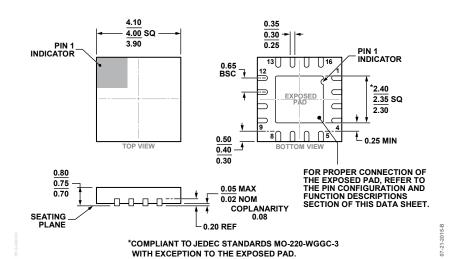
16-Lead Lead Frame Chip Scale Package [LFCSP] 4 mm × 4 mm Body and 0.75 mm Package Height (CP-16-20) Dimensions shown in millimeters
